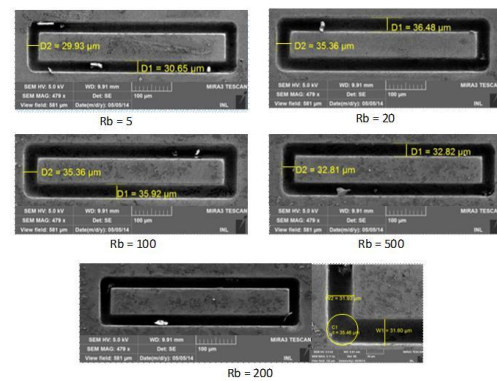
Top view of the channels machined in stainless steel (SEM).
